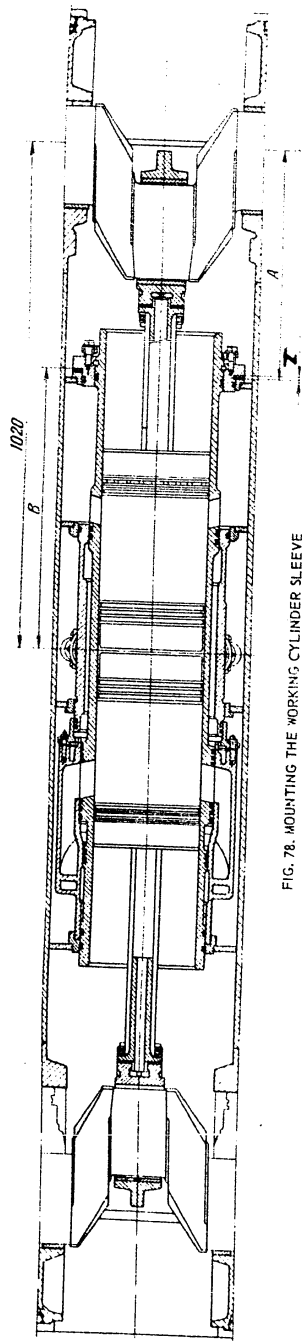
MOUNTING THE WORKING CYLINDER SLEEVE
